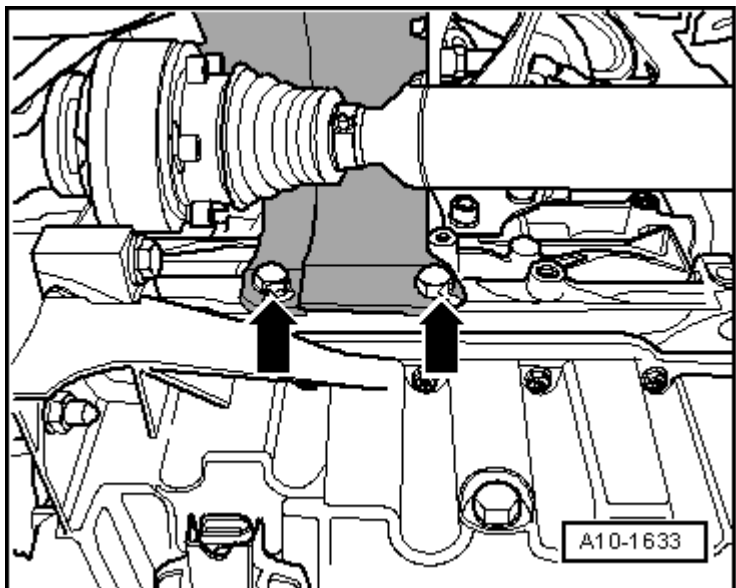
Identifying Protective Cap For Drive Axle On Engine
